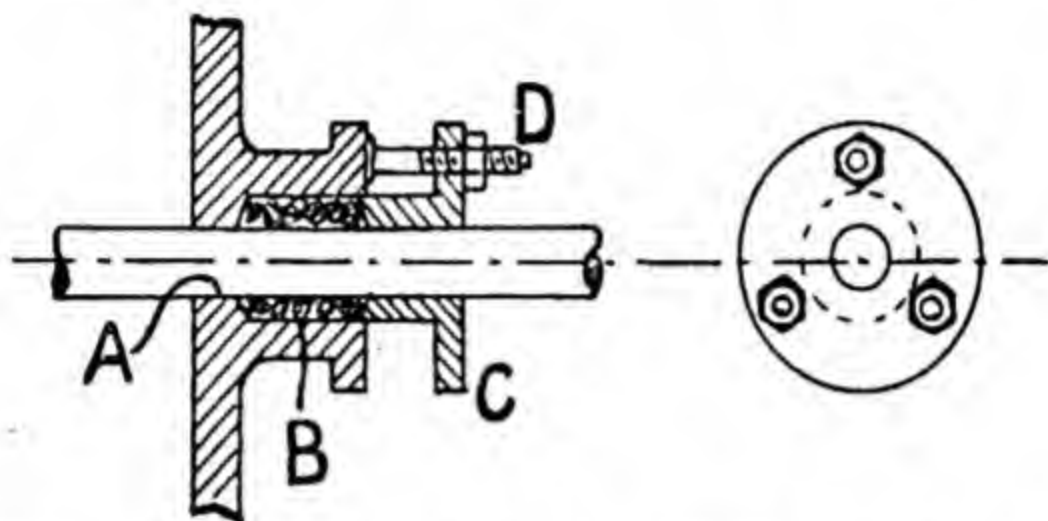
Stuffing box and gland for rendering the piston rod steam-tight.
